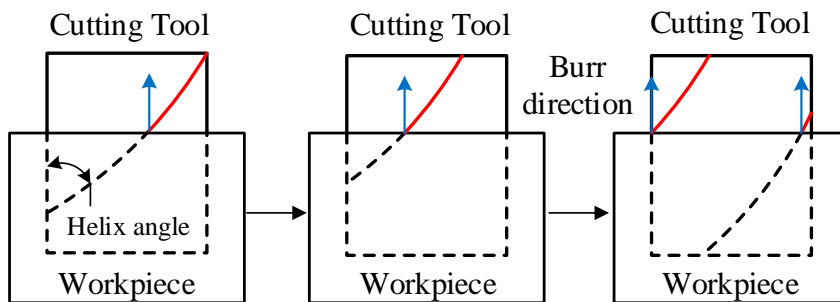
Side view of shoulder end milling⁹⁾.
